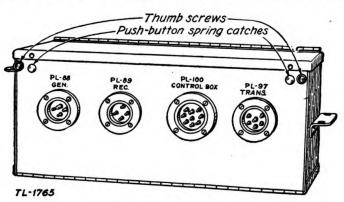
Box BX-12 or BX-12-A, front view, closed.
